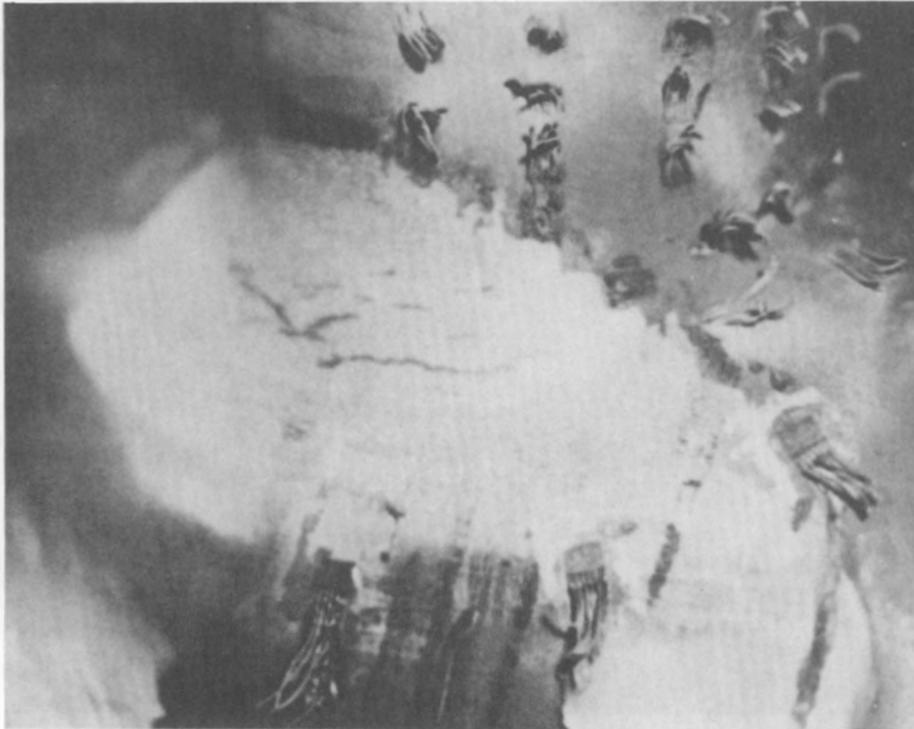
Fatigue cracks in T-15 after 9550 cycles.
